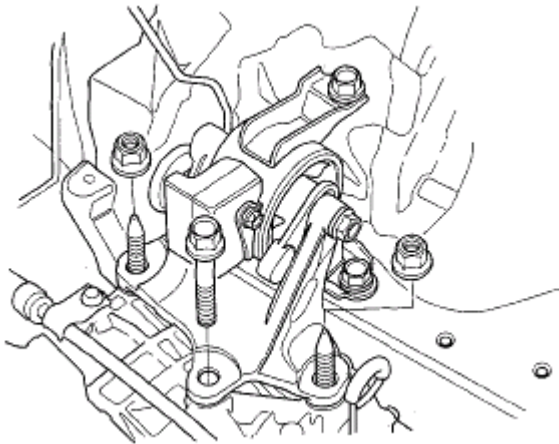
Identifying Transmission Mount Bracket Support Bolt And Nuts
